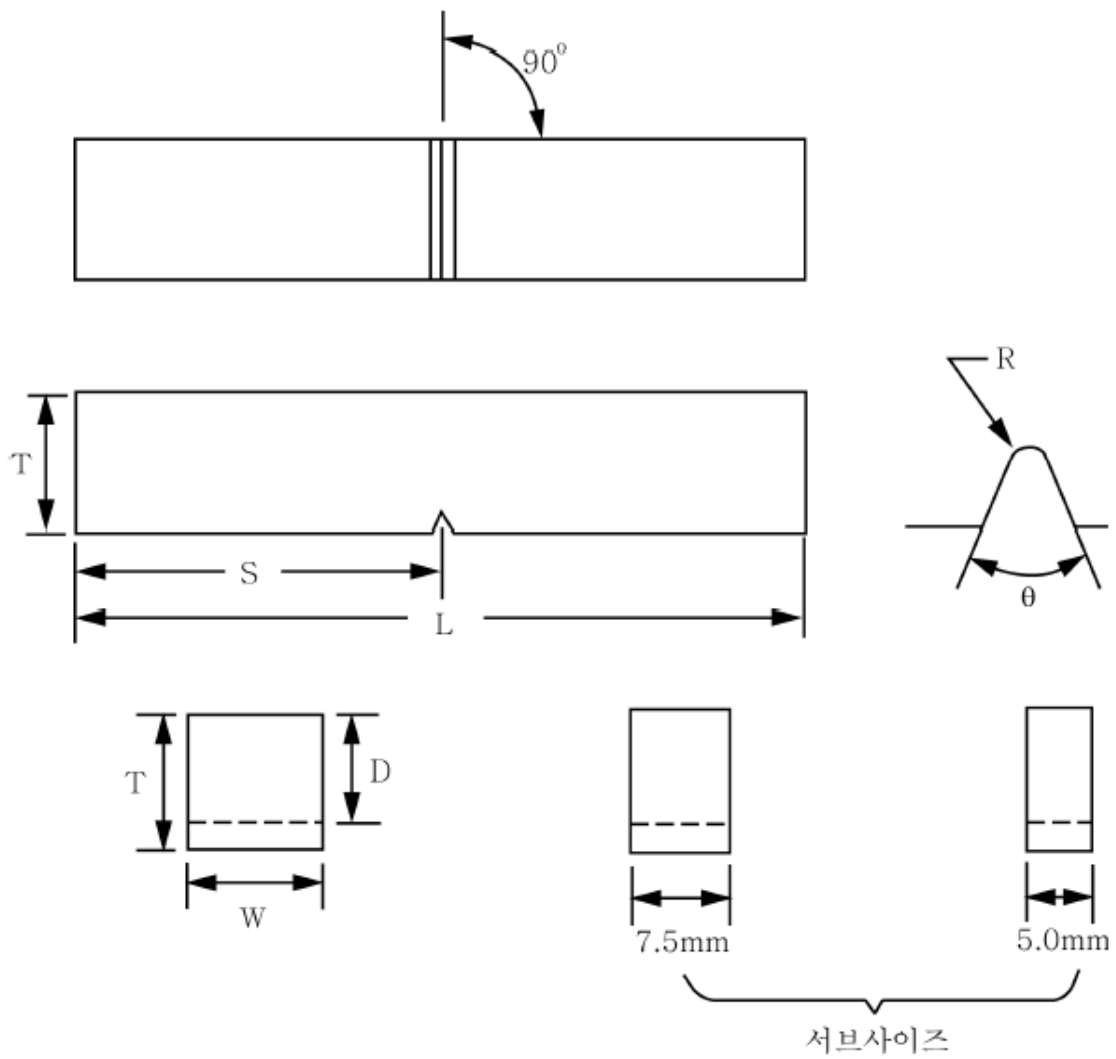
Shapes and dimensions of the Charpy impact specimen
